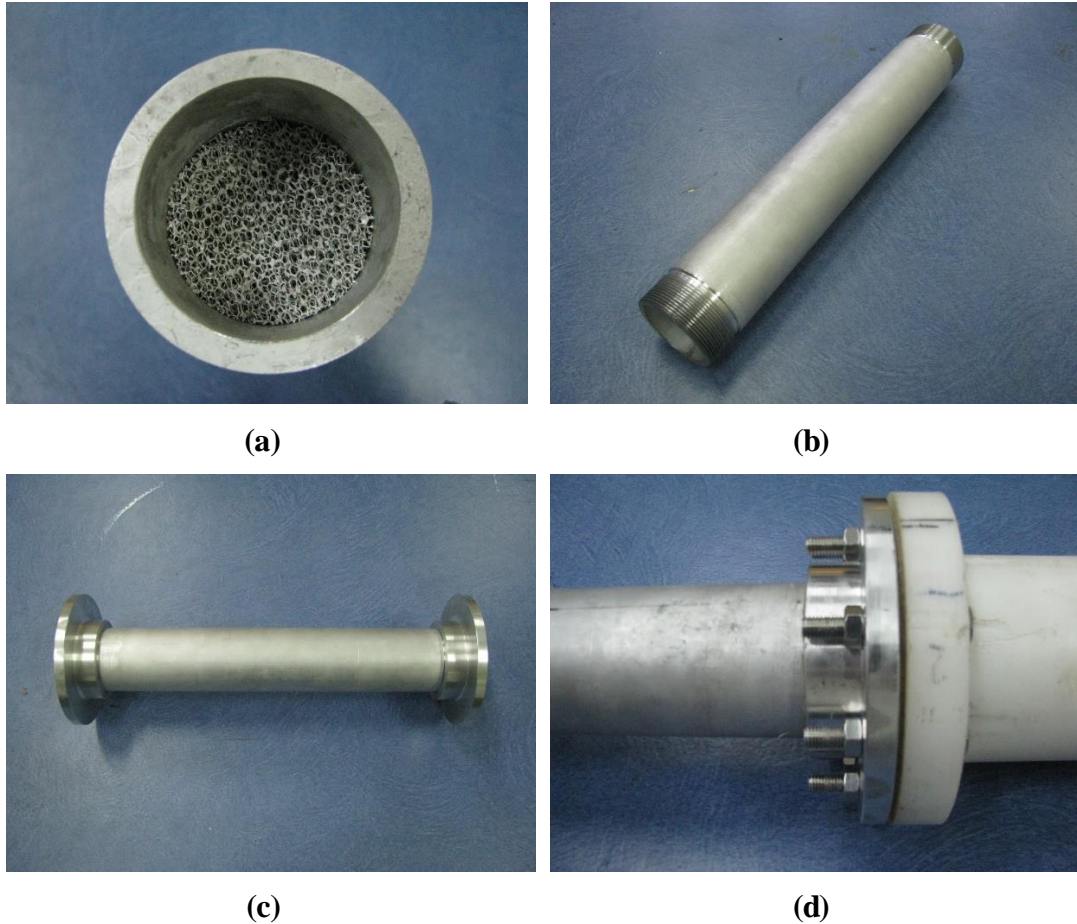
Photographs of the test section: (a) 20-ppi metal foam brazed in an aluminum tube, (b) Aluminum tube with threaded ends, each 3-cm-long, (c) Flanges installed on the tube and (d) Assembly point of the flanges and the polyethylene tube.
